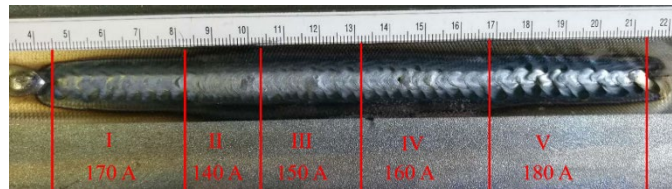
Welded Workpiece from Human-robot Collaborative Welding.
